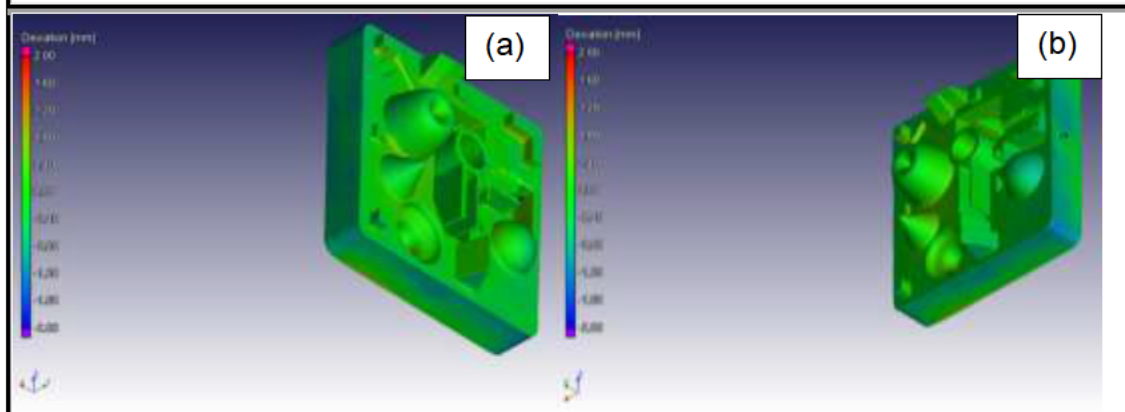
3D images: (a) bottom-right-back and (b) bottom-back-left
